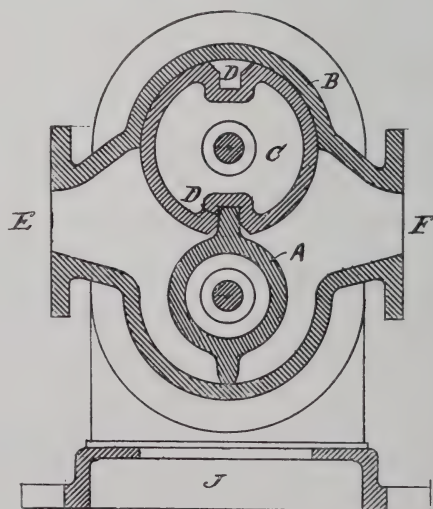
SECTIONAL ELEVATION OF DOUBLE CYLINDER ROTARY PUMP.
